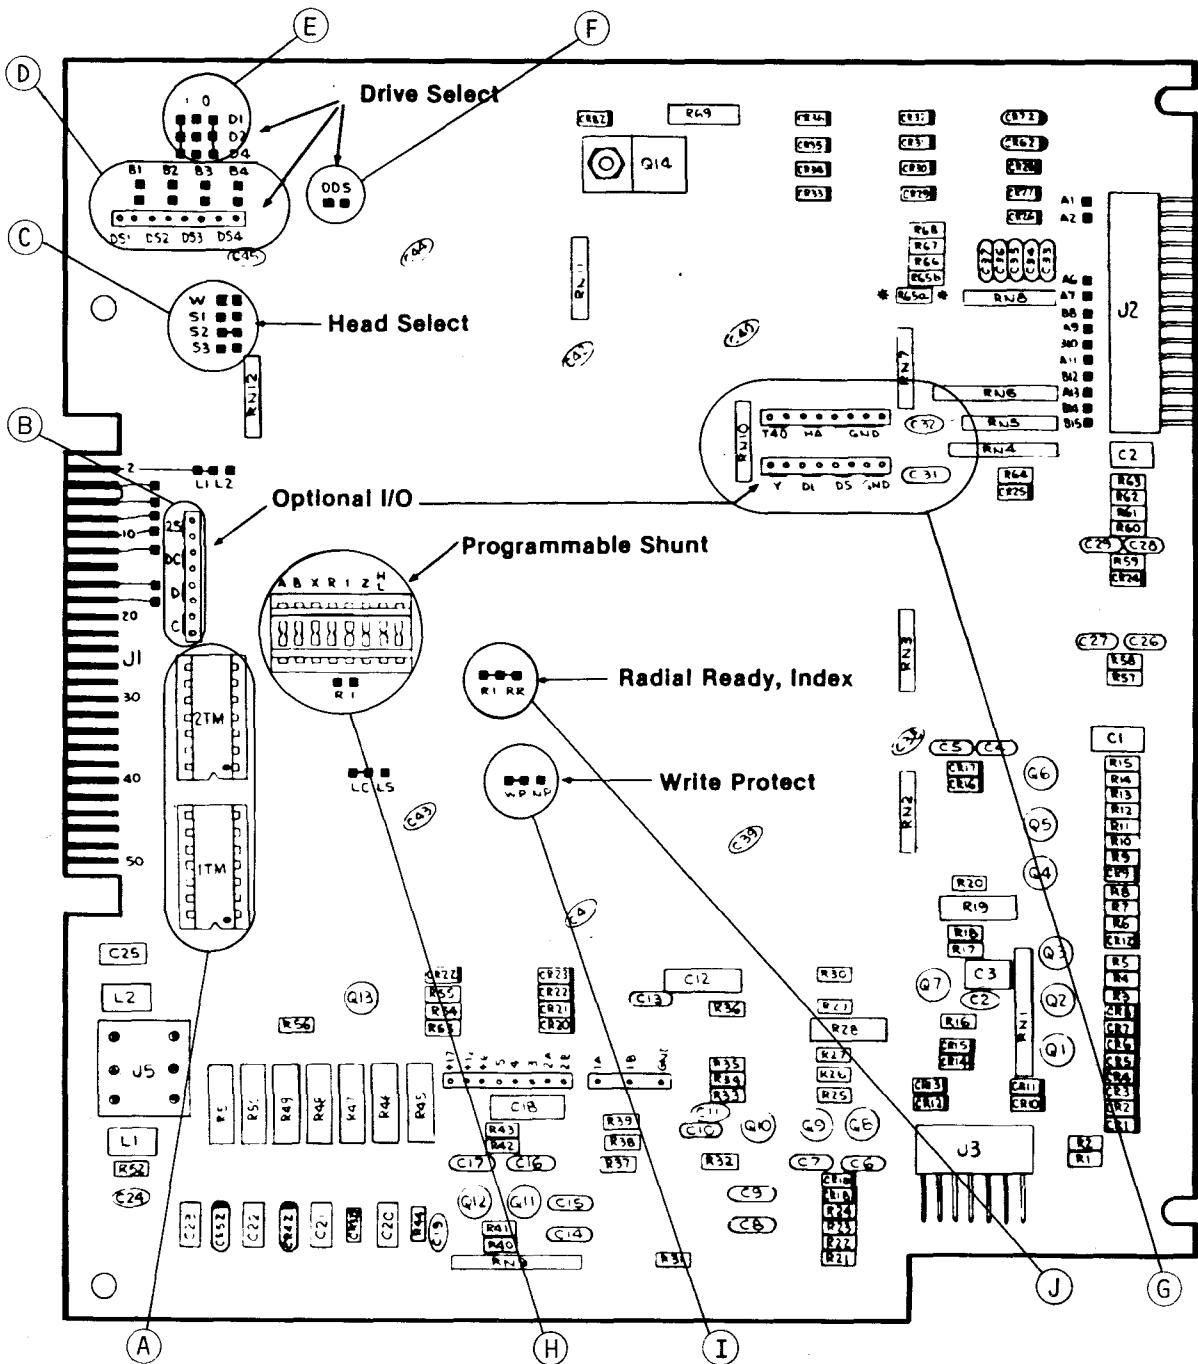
JUMPER LOCATIONS ON THE QUME DT-8 DISK DRIVE
